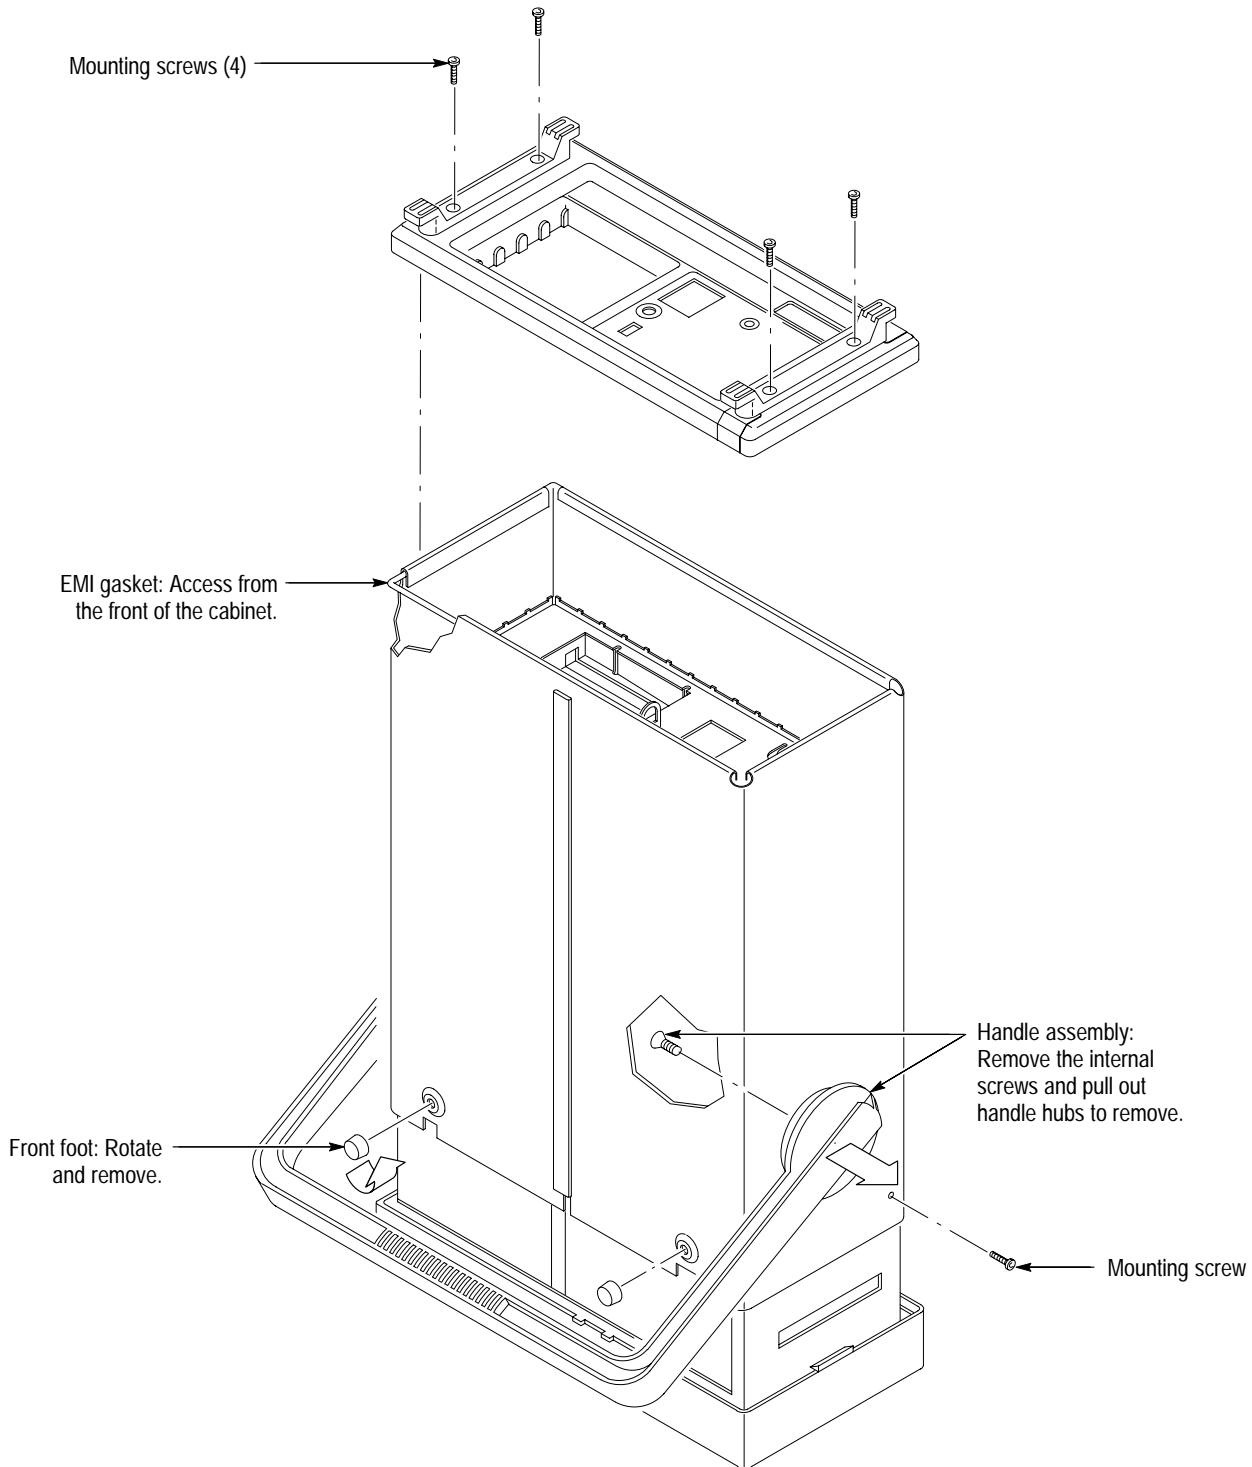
Rear cover, cabinet, and cabinet handle and feet removal
